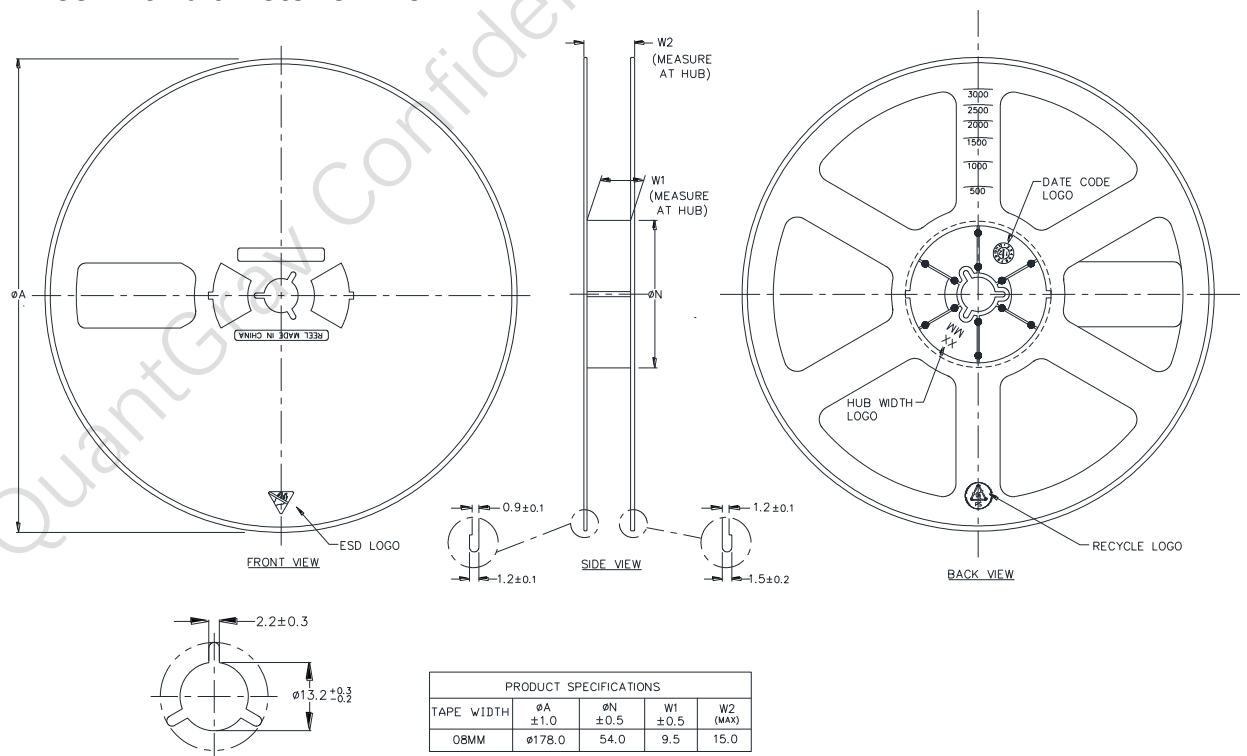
Drawing of reel (first-angle projection) with diameter of 178 mm
